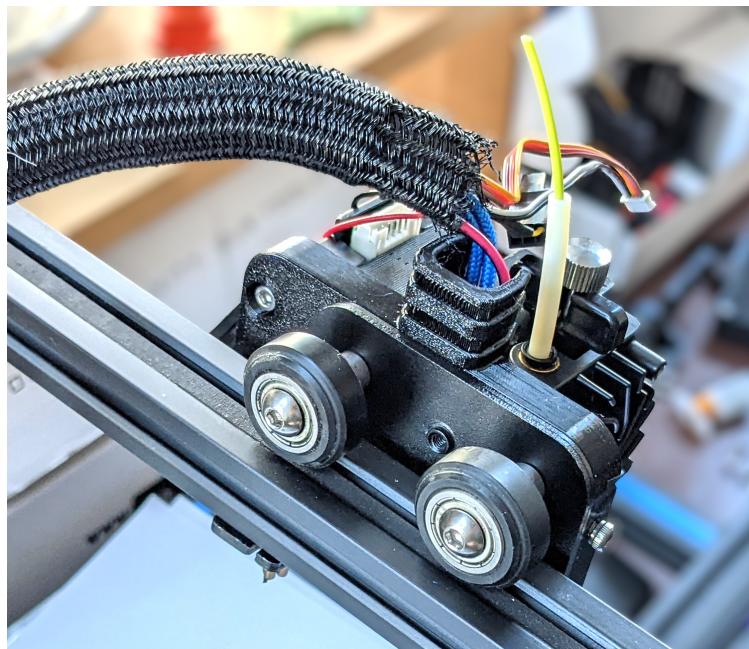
Press the mounting plate onto the X-carriage, and secure with the screw in the cable channel. Next, attach the wheels and tighten the carriage.
